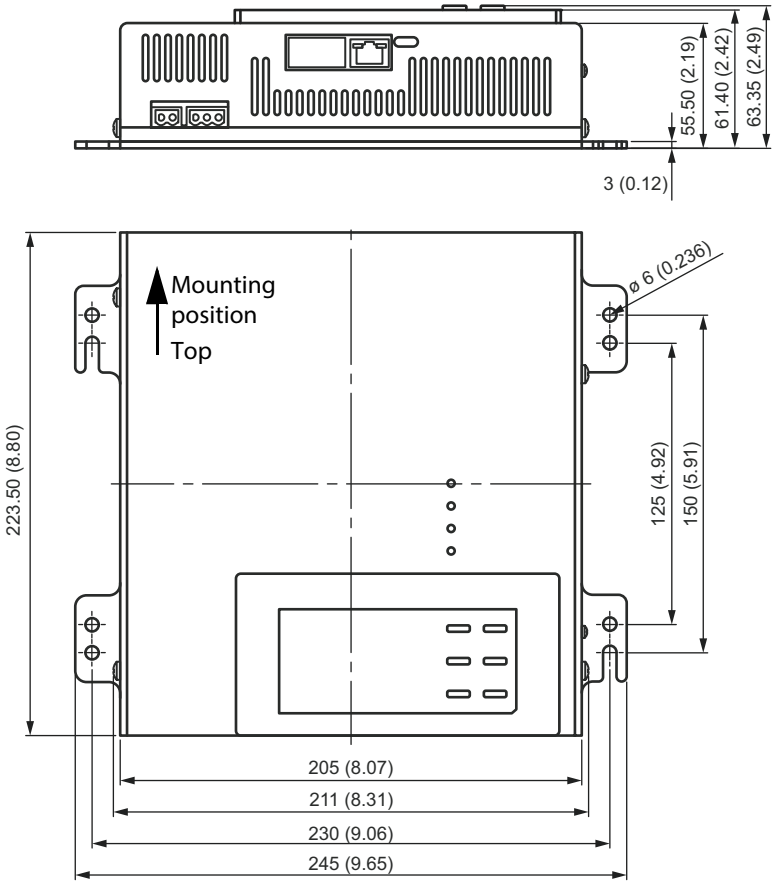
Dimension diagram and mounting position NGRM7...; mm(in)
